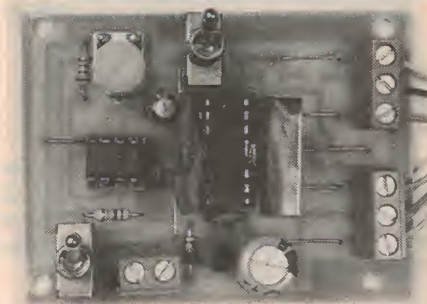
This is the prototype experimenter's 5804 stepper motor controller board. Copper shim heatsinks should be soldered to pins 4 and 5 and pins 12 and 13 of the 5804. Make sure the heatsink doesn't touch other IC pins though.
